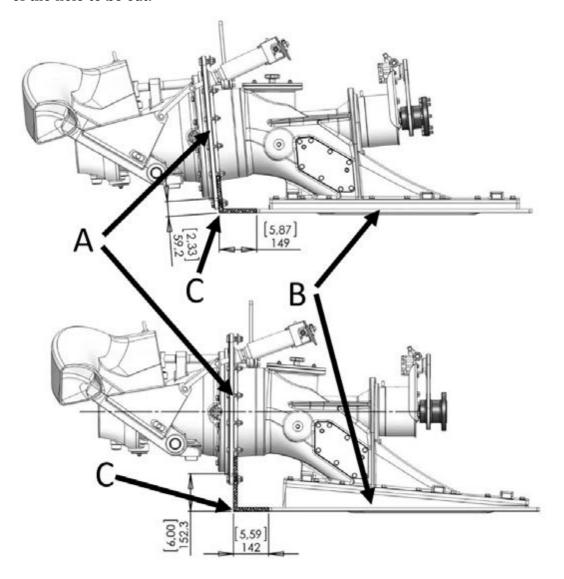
Hole positions in the boat hull (welded installation)
